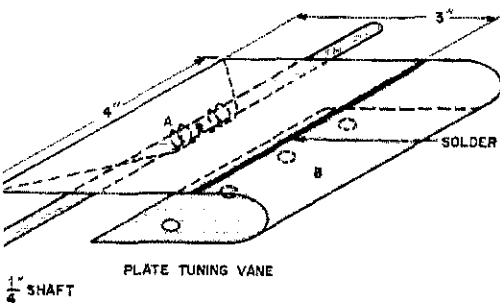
The plate-tuning vane is assembled by soldering a piece of thin flexible metal to a piece of brass stock. The thin material provides a good rf path to the chassis. Note that the fishing line is wound in or let out by both ends of the shaft simultaneously, thus pulling on both corners of the vane at the same time.
